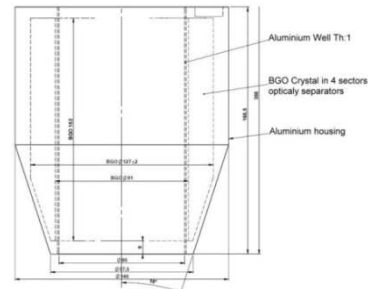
Cross-section of BGO detector crystal and aluminum casings. All dimensions are given in millimeters.
